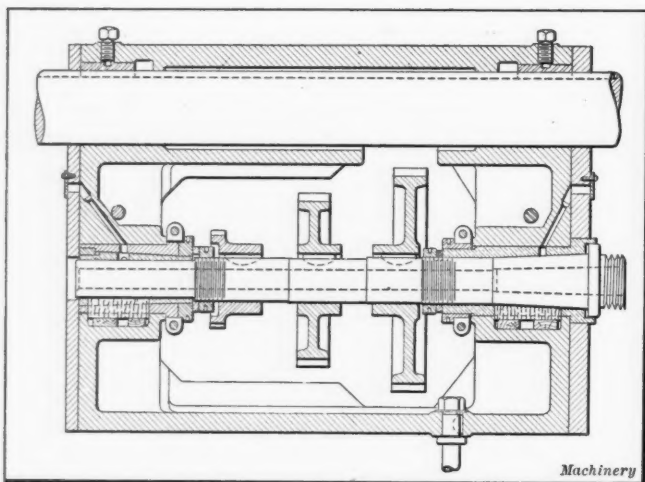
Cross-sectional View of Spindle Head and Driving Gear Connections
